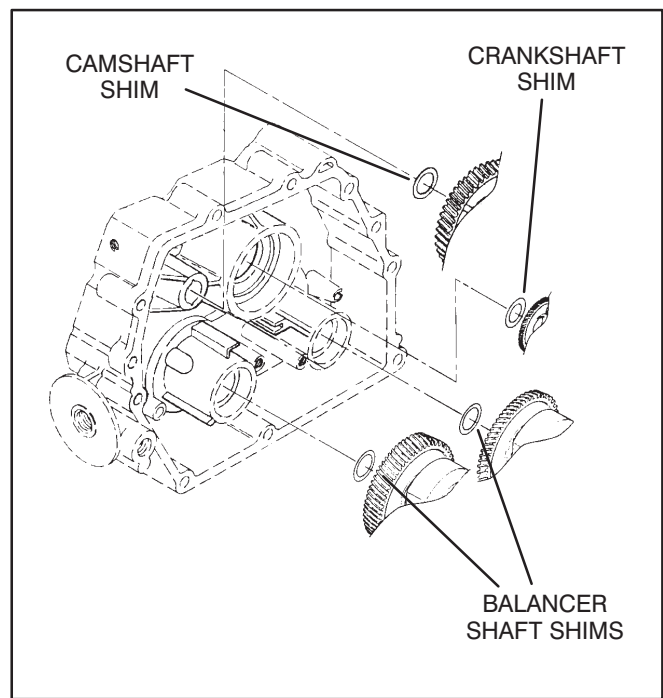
SHAFT END-CLEARANCE SHIM LOCATIONS
